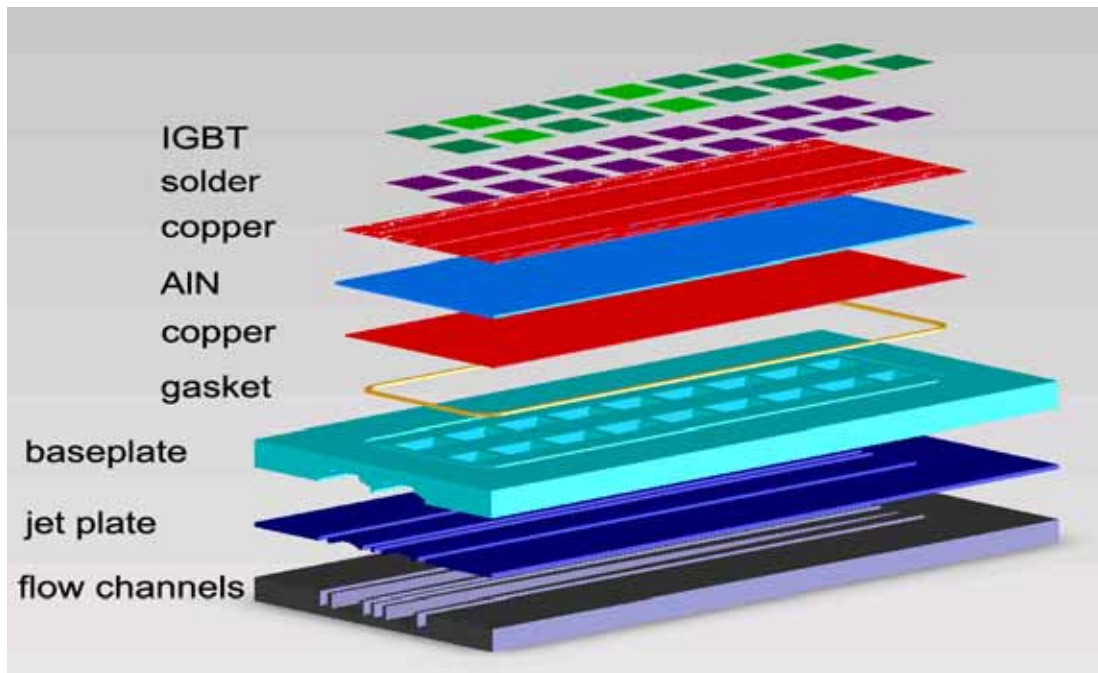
Detailed View of Low-Thermal-Resistance IGBT Structure in Gen14 Design
